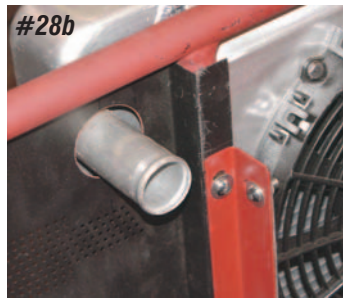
& 28b & 28c: The radiator bolts to the V8 brackets using the supplied stainless steel Allen head bolts. The radiator can be adjusted up or down to center the upper water neck perfectly in the new hole in the filler panel. With the radiator in the 6-cylinder position, even with the electric fan system there is plenty of room for any fan belt configuration.
